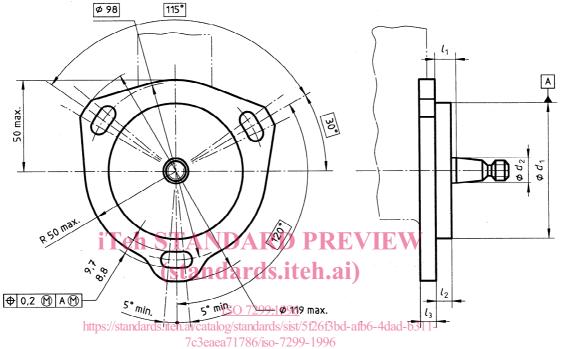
In-line fuel injection pumps — Type 4 end-mounting flange
